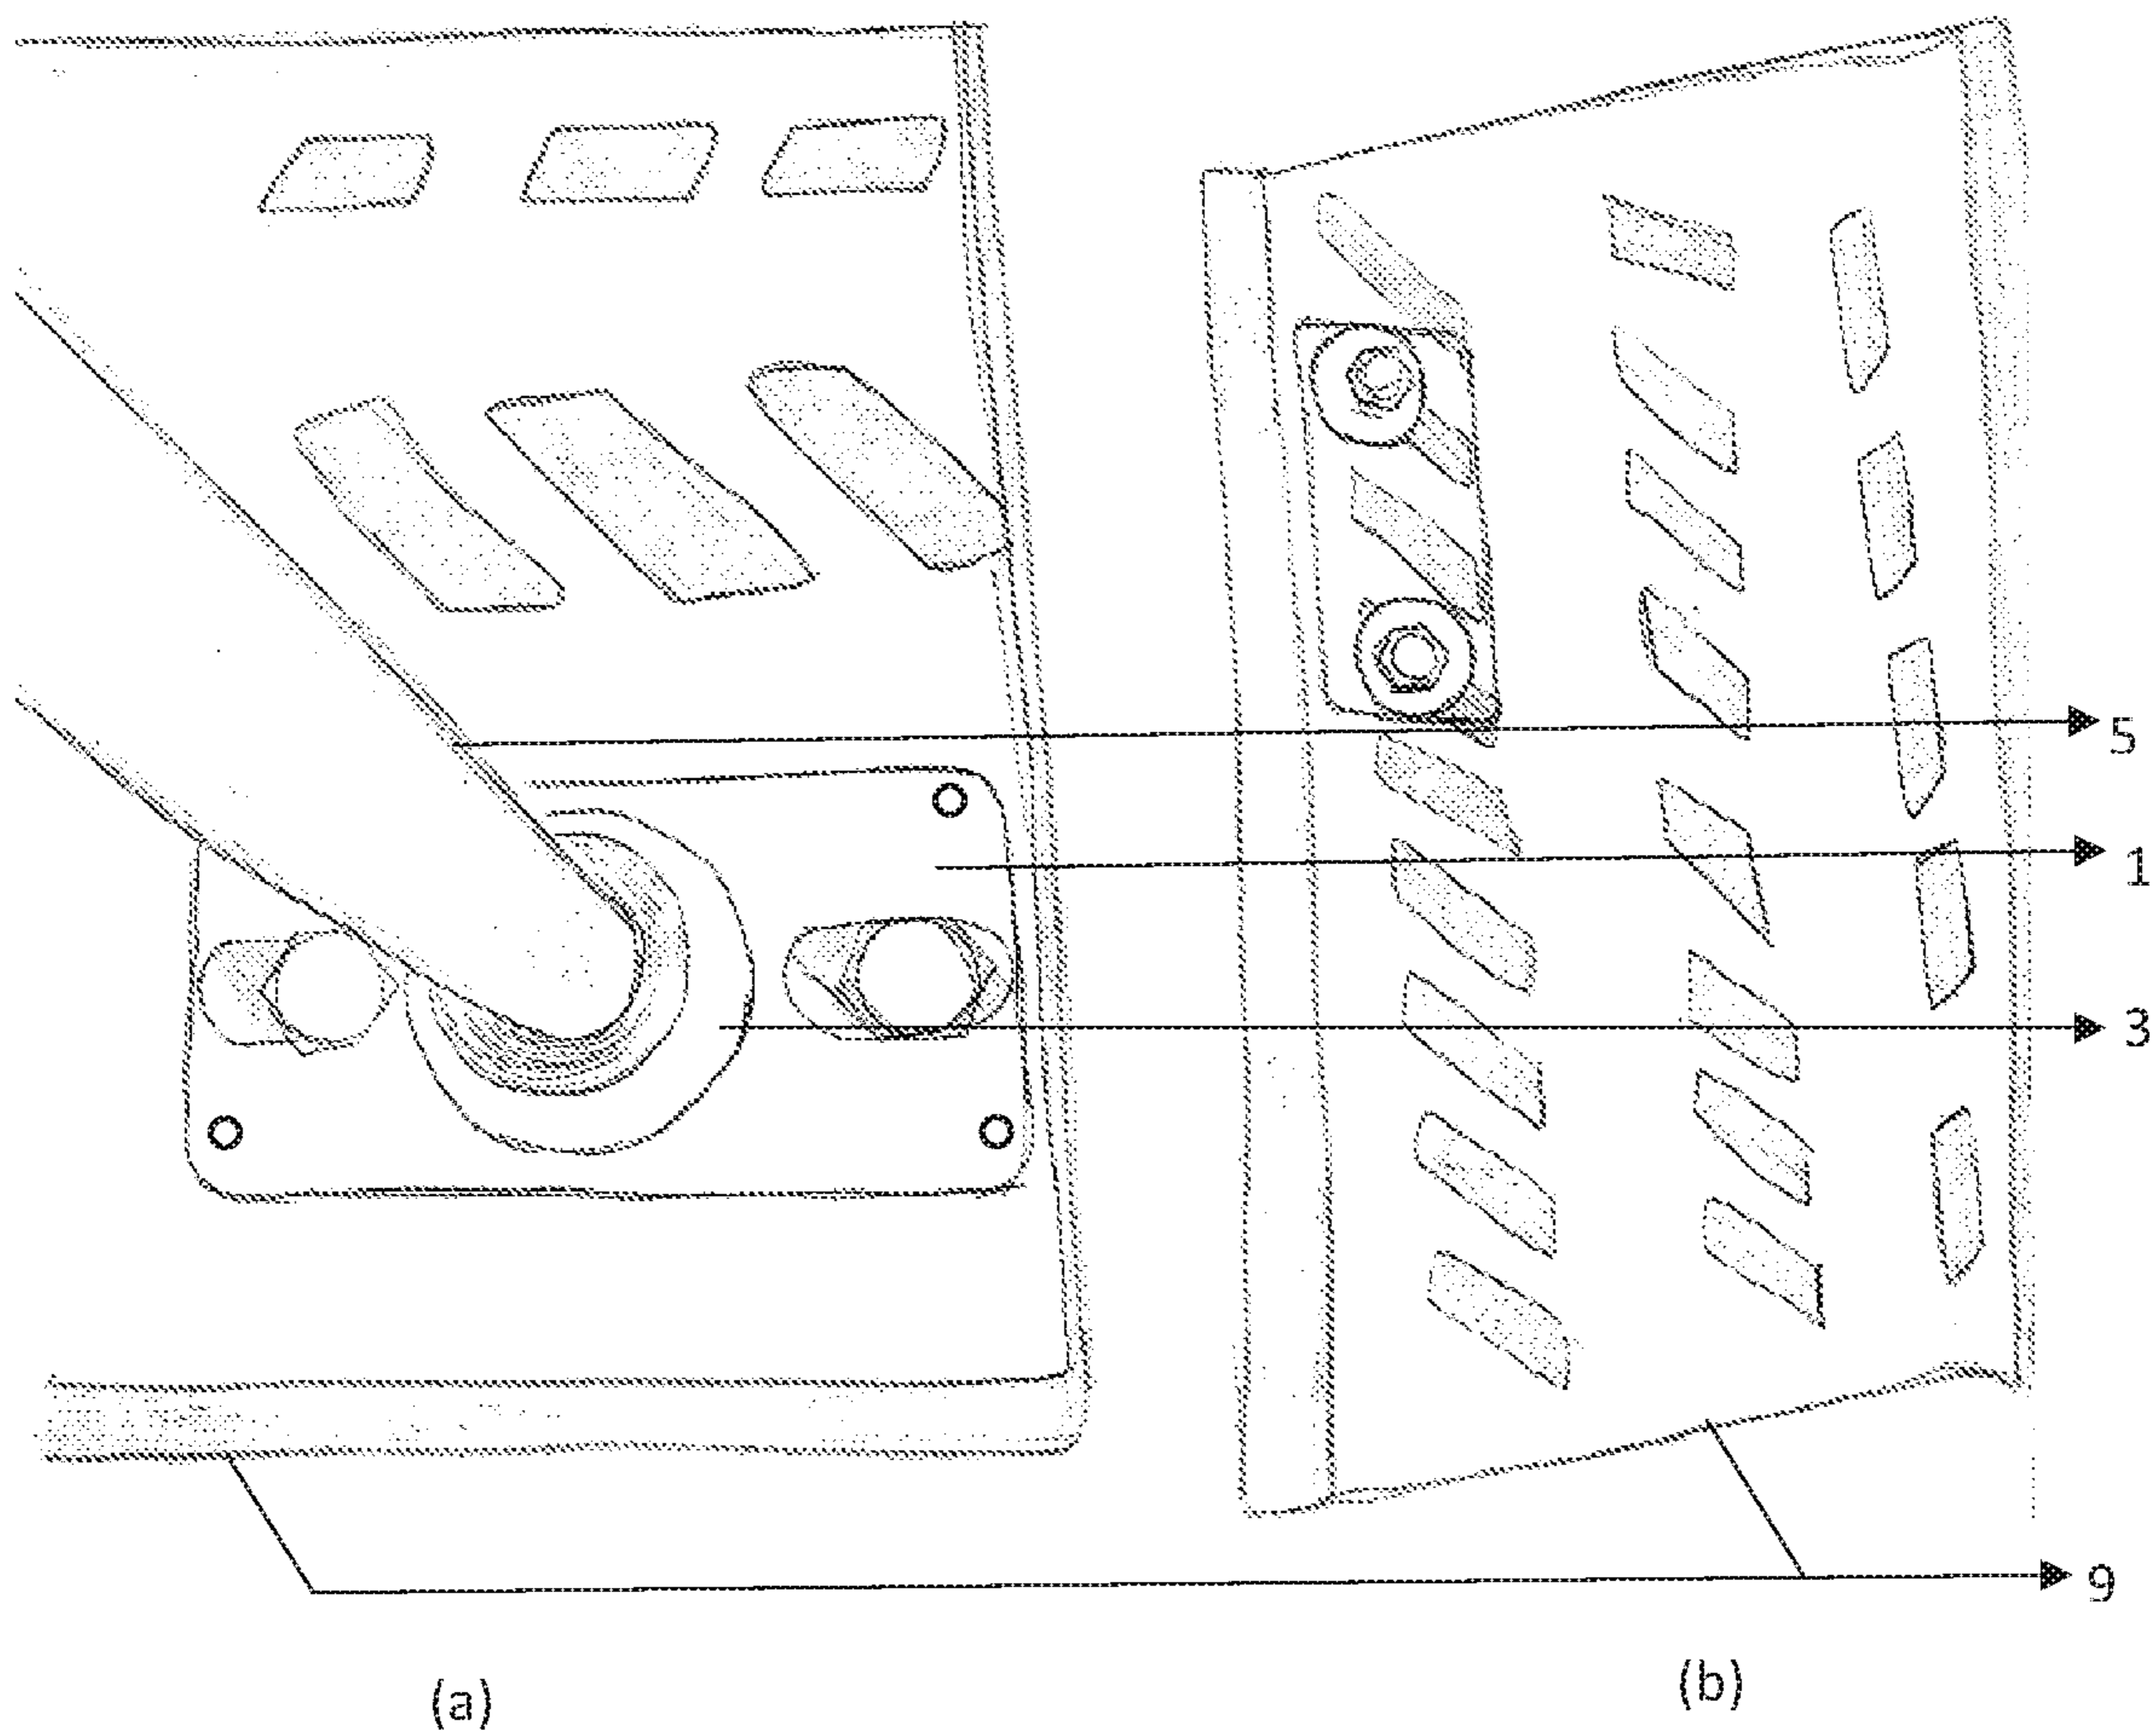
MODULAR STAND MOUNTED ON PEDAL BOARD WITH CHANNELING
